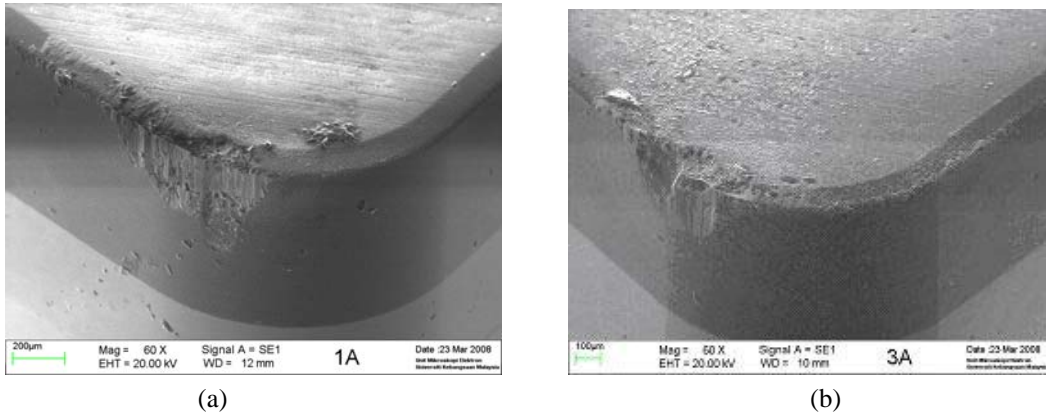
SEM micrograph of CBN tools while machining Ti-6Al-4V at cutting speed 180 m/min, feed rate 0.05 mm/rev (a) depth of cut 0.1 mm, (b) depth of cut 0.5 mm.
